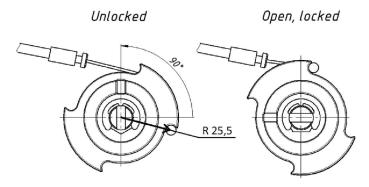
Interlocking shaft of ISM15_ HD_1 operation by release cable
